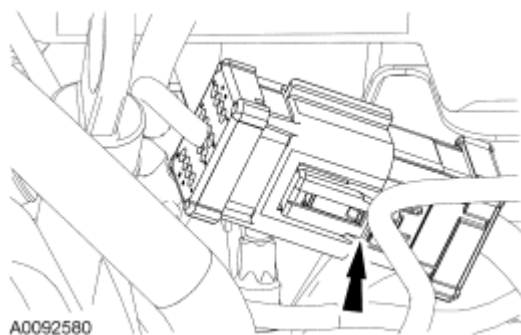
Locating Fuel Charging Wiring Harness Electrical Connector
